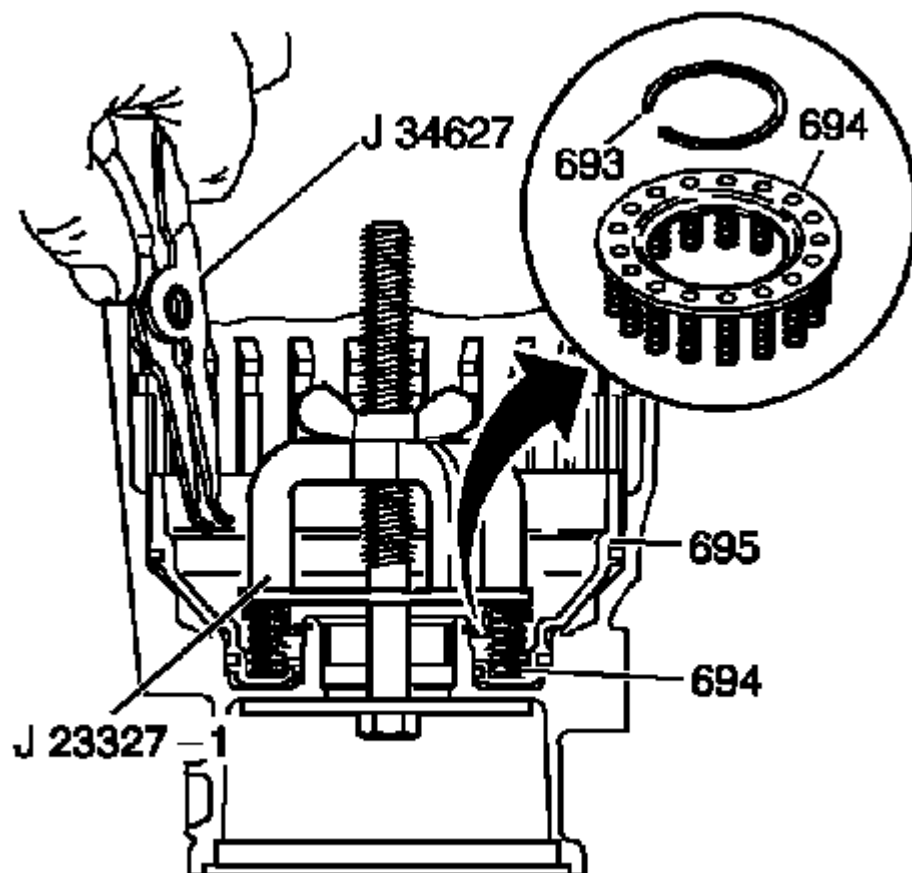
Third And Fourth Clutch Accumulator Housing Components
